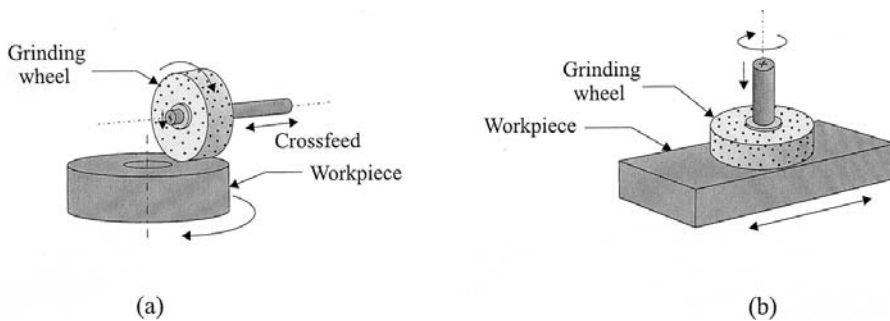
Surface grinding with (a) a horizontal spindle; (b) a vertical spindle.
